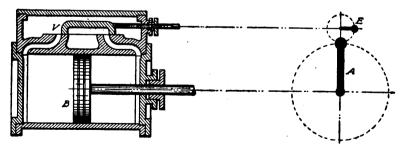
Position of Piston and Valve in Cylinder Shown in Fig. 3, after One-Half Stroke
